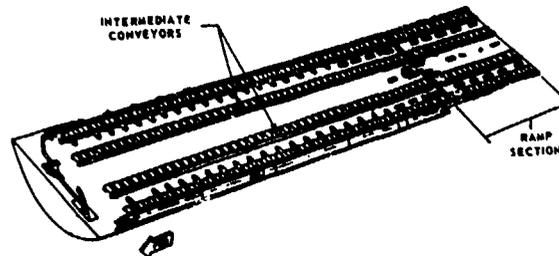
Roller Conveyor Sections and Rail System Used in C-130 Transport
